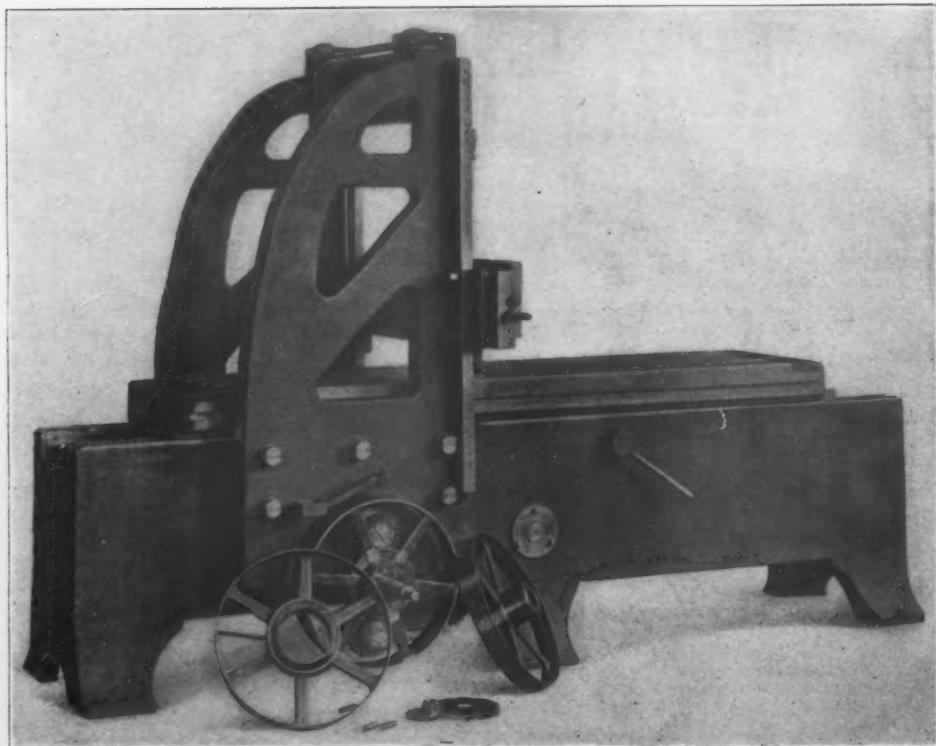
View of the Opposite Side, Showing the Differential Gearing and Ratchet Pulley.
